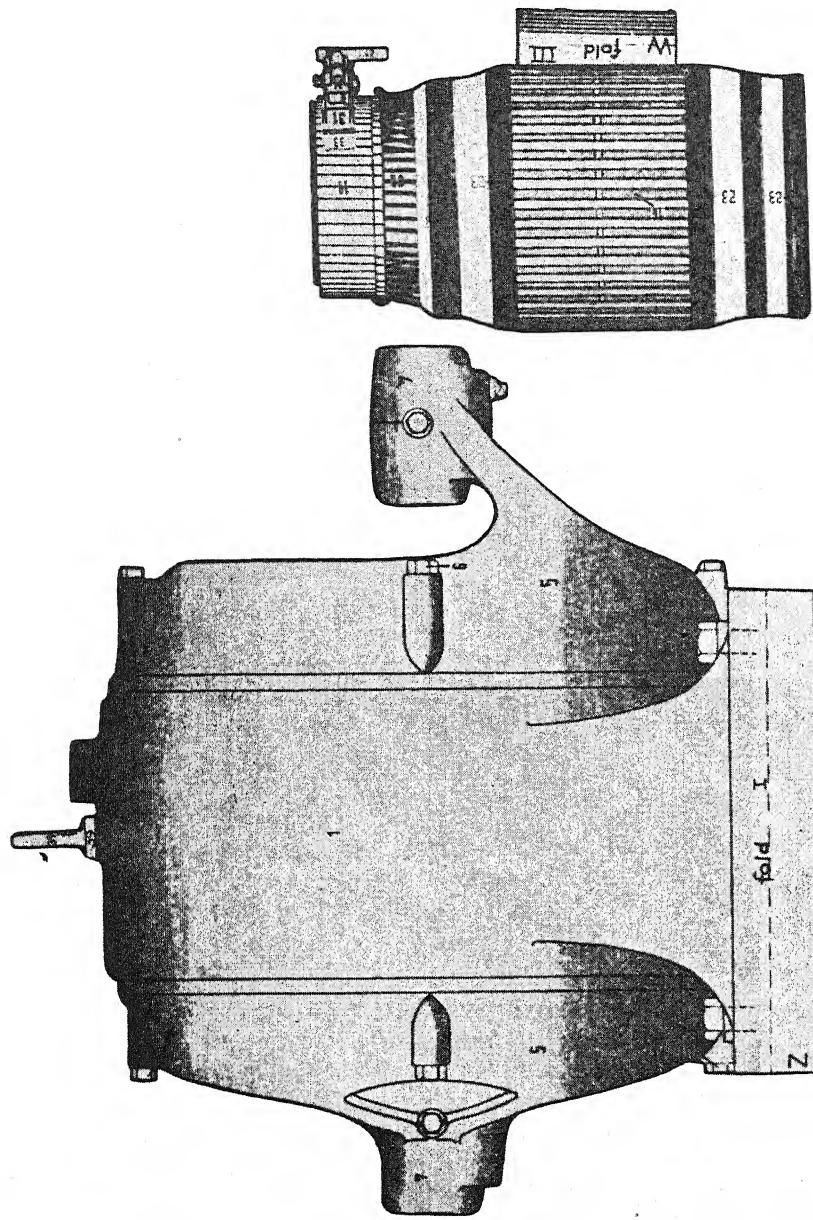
Two more sections of a 4-pole d.c. machine.
